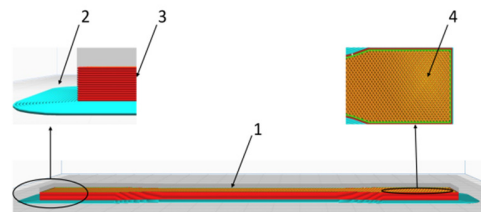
Tensile test specimen in Cura Slicer software: (1) specimen, (2) specimen holder, (3) overlapping layers, (4) filling pattern.
